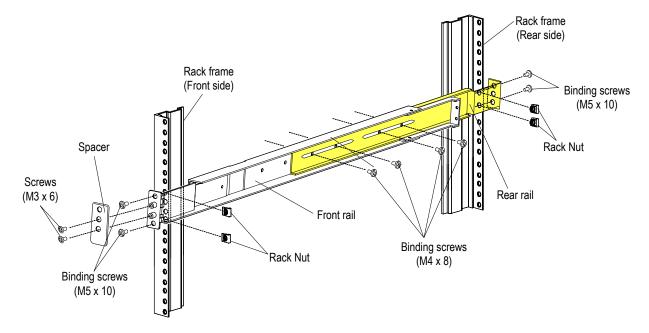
Installing the Rail (RS6000 rack frame)
